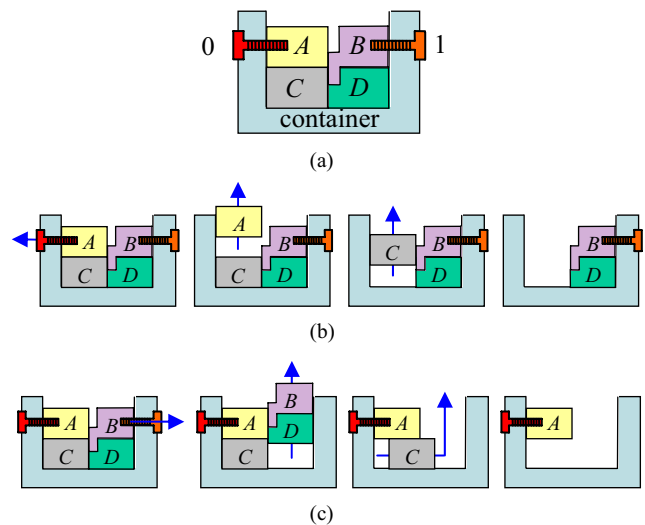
Concept of multiple product-embedded disassembly pathways.
